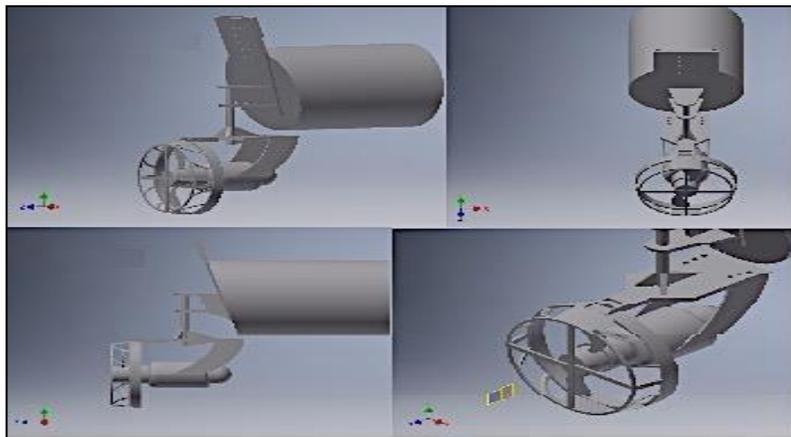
Inventor Models of Propulsion Motor, Mount, and Shafting Assembly
